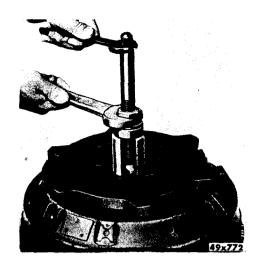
Line Burnishing Bushings (Tool C-790)
